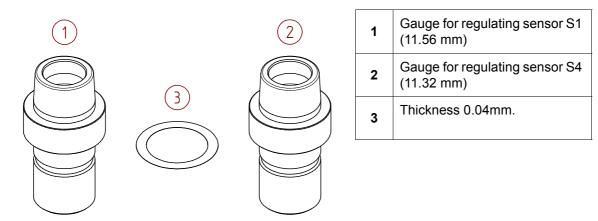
the use of the gauge as a normal tool holder, with or without spacer inserted
